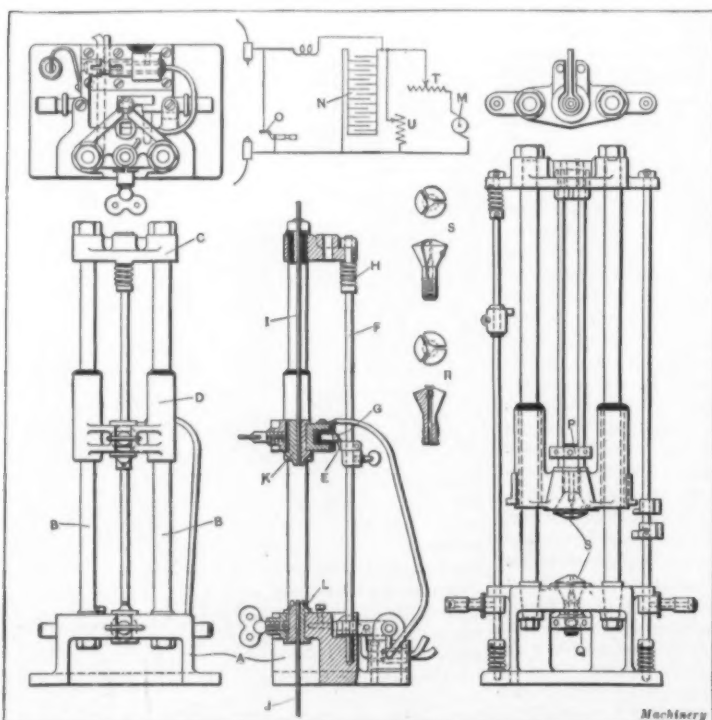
Plan, front and sectional elevation of portable percussive welding machine and connections. Two types of machines are shown.
